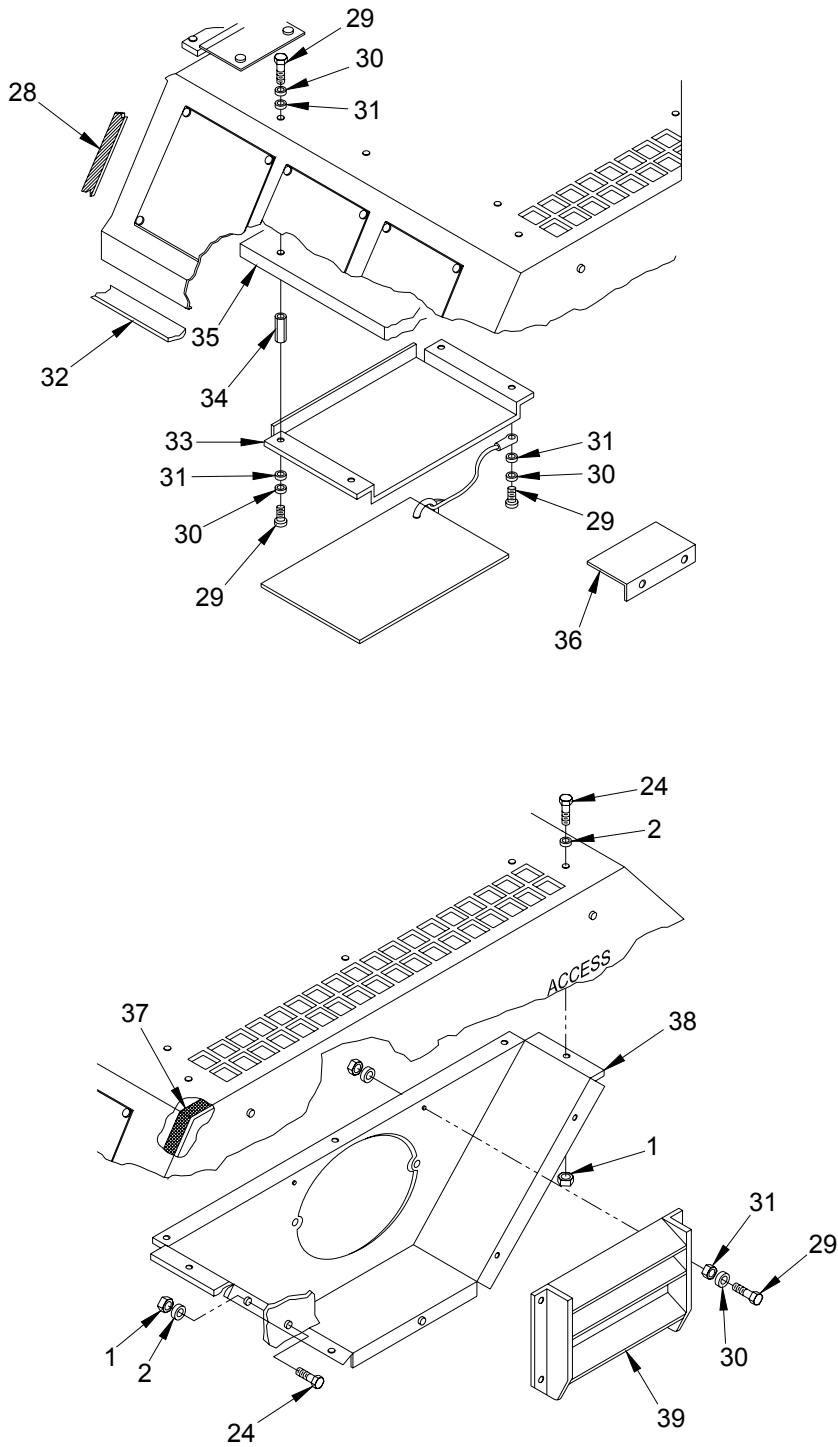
FRAME AND HOUSING ASSEMBLY/MAIN ACCESS COVER
